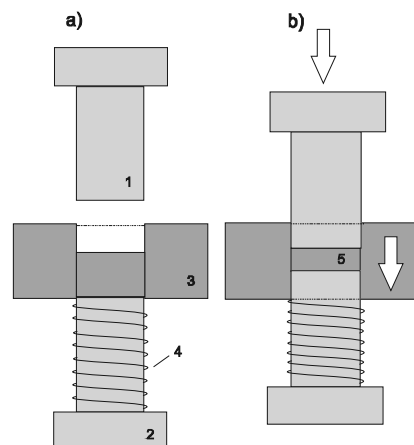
Floating die compacting: a) filling with powder, b) compacting; 1 – upper punch, 2 – fixed lower punch, 3 – die, 4 – compacted spring, 5 – prepreg
